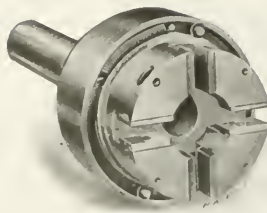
Arrangement of Chaser Guides in Rickert-Shafer Threading Die
